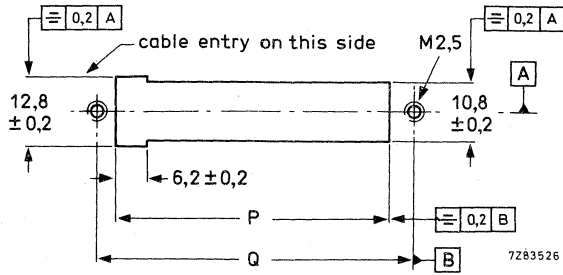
Panel cut-out for the female part; see Table 5 for dimensions P and Q.
